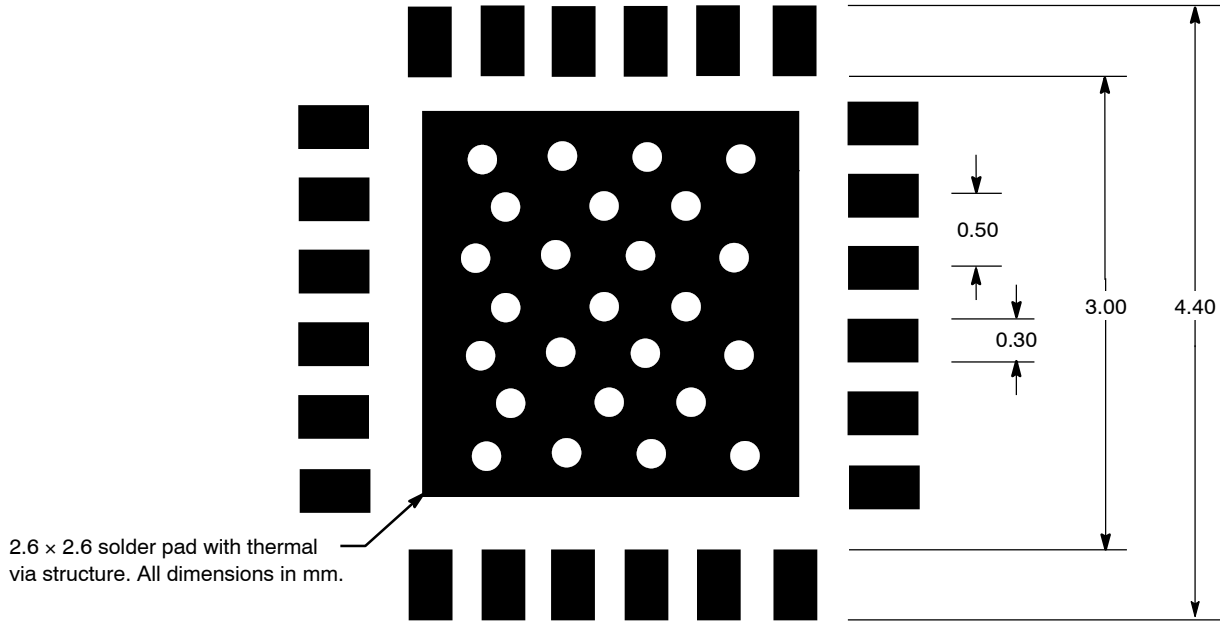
PCB Pad Layout for 24-Lead QFN 4 × 4
